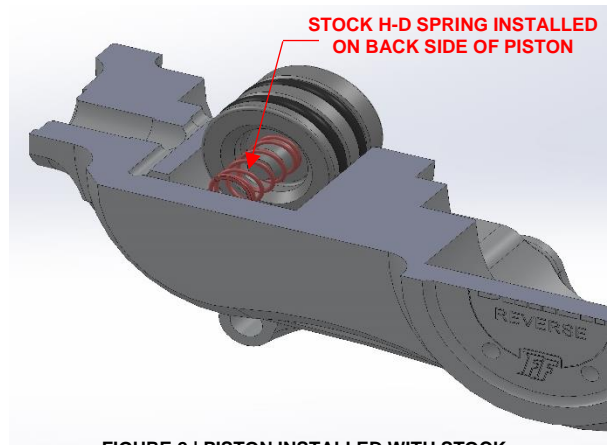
| PISTON INSTALLED WITH STOCK H-D SPRING | SECTION VIEW SHOWN
